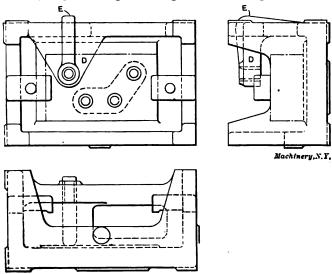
Modification of Jig in Fig. 91, which practically brings it into the Class of Open Drill Jigs
